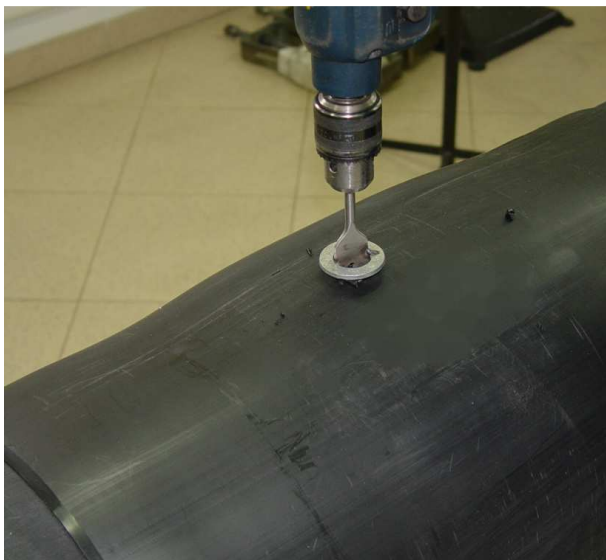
Execution of a hole of 25 mm in diameter using a spade bit and a drill
